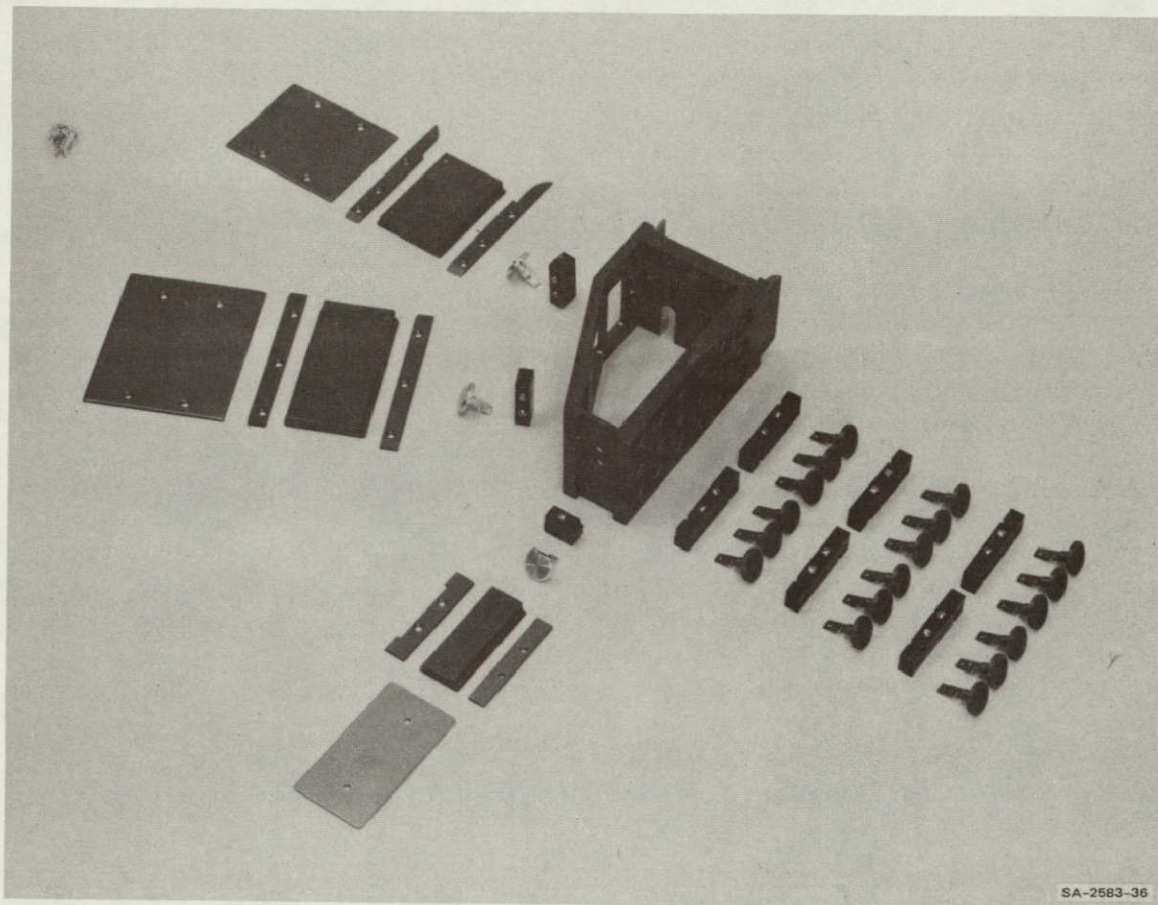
LAYOUT VIEW: RIGHT JAW BODY AND ASSOCIATED PARTS
